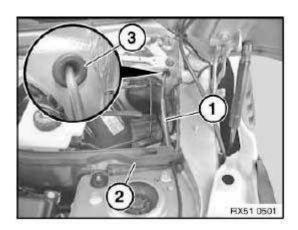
Identifying Cable, Front Bulkhead And Grommet Courtesy of BMW OF NORTH AMERICA, INC.
